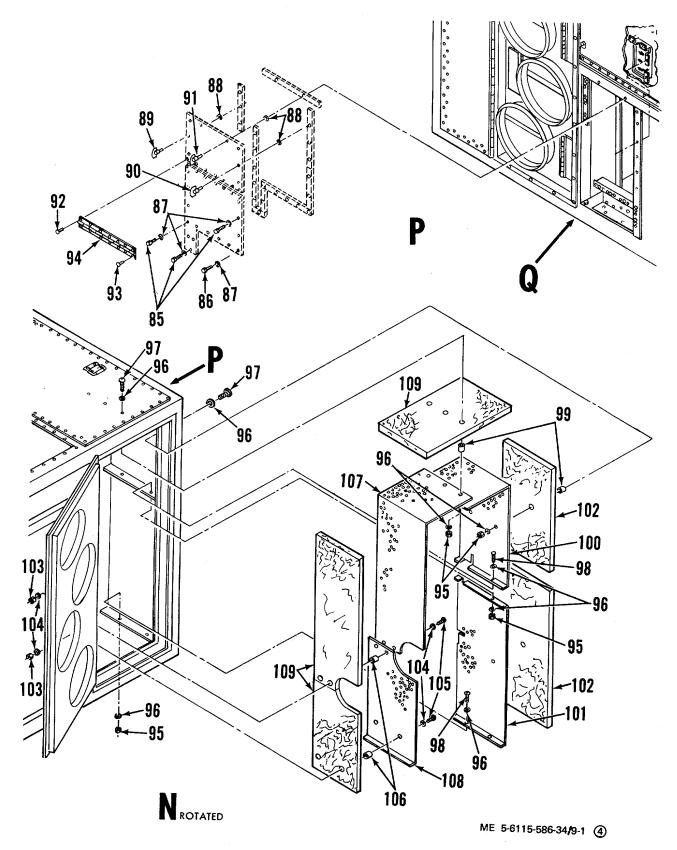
Enclosure assembly, exploded view. (sheet 4 of 10)
